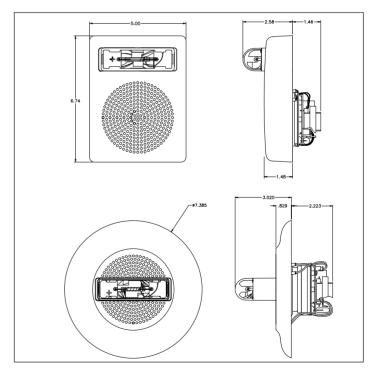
E50 (top) and E60 (bottom) Speaker Strobes - Front & Side Views
